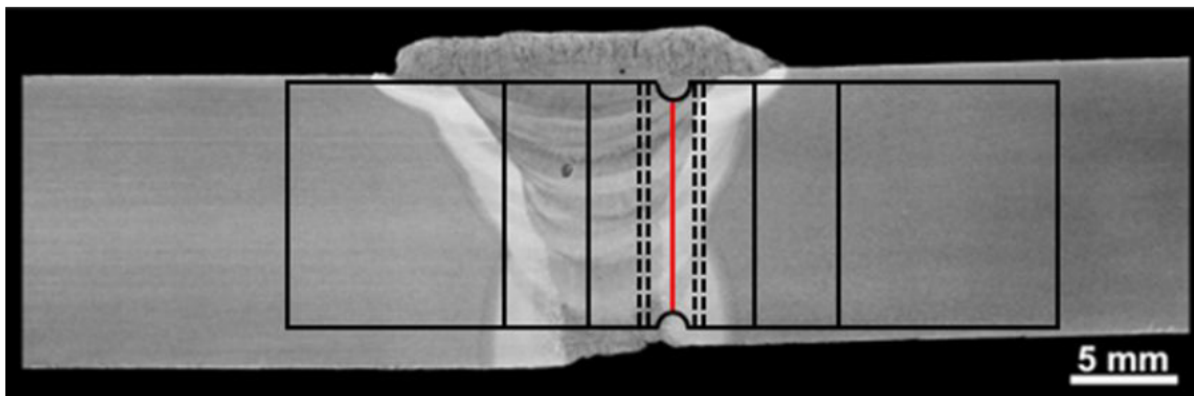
Sketch of a typical CT specimen geometry superimposed on a metallographic cross section through the X60A girth weld.
